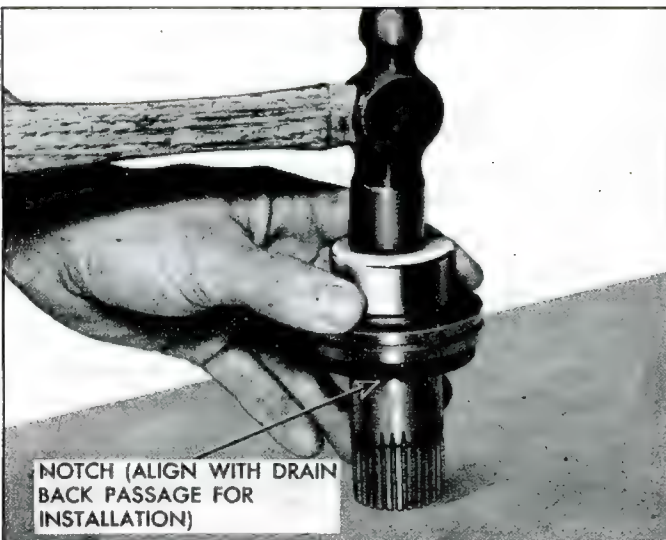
Installing Pinion Rear Oil Seal in Stator Shaft with J-8448-1
